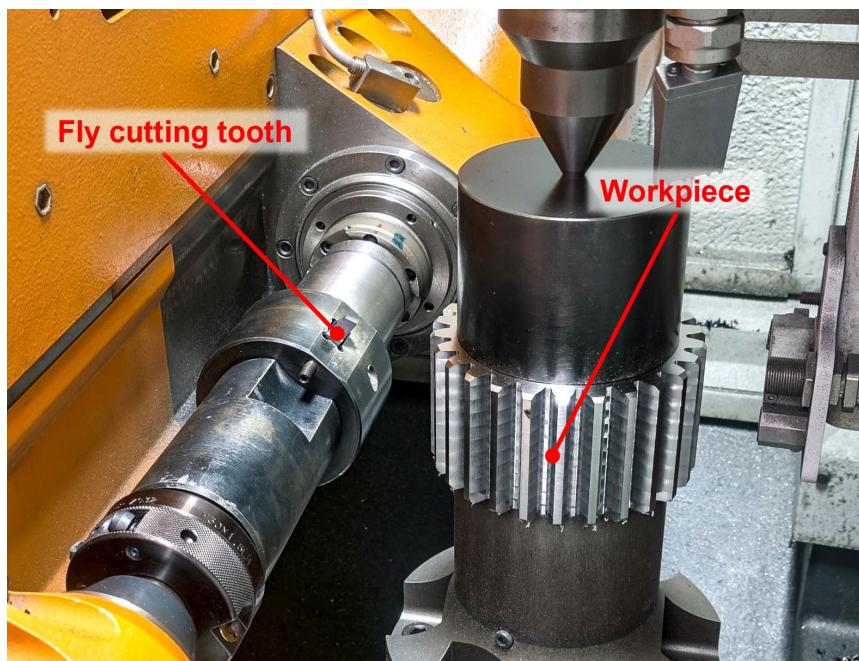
Experimental setup: Fly cutting test on Liebherr LC180 gear hobbing machine.
